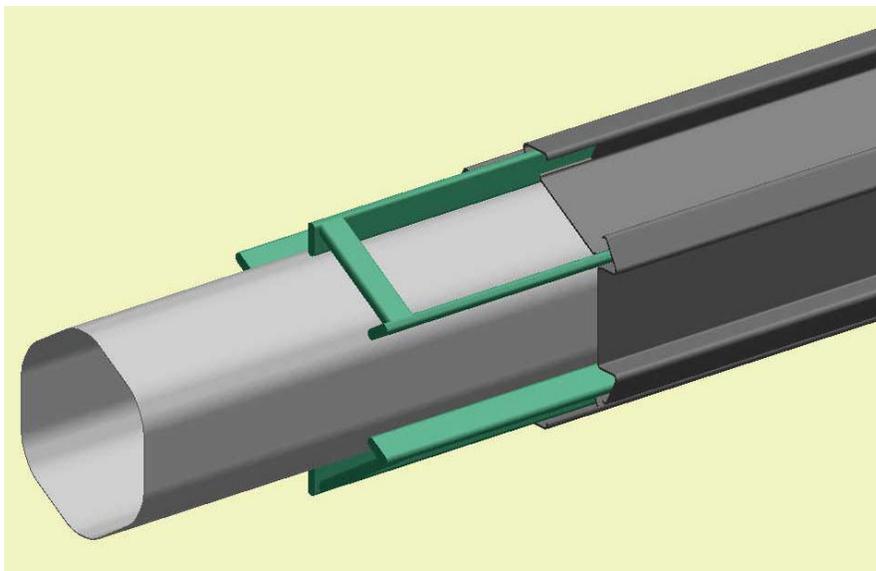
Exploded view of cooling tubes showing the turnaround pipe.
